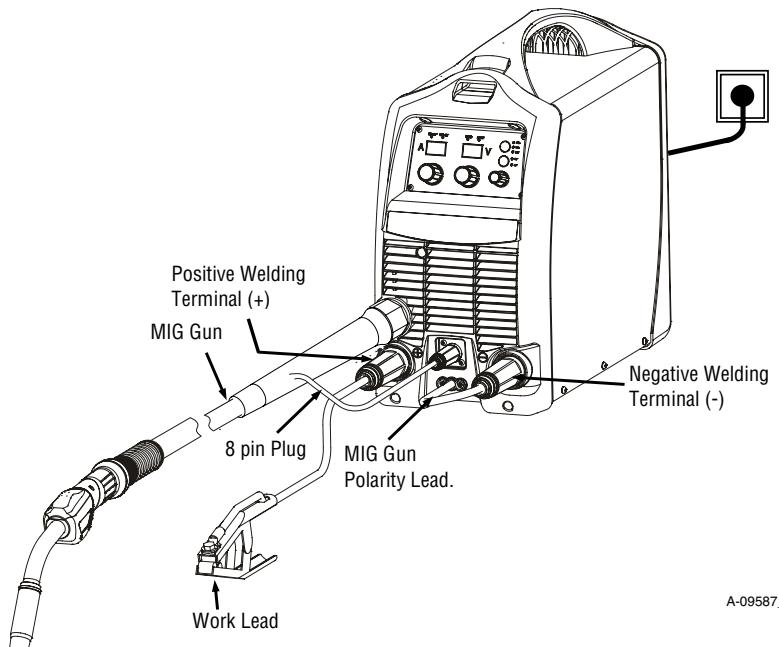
Setup for MIG Welding with Gasless MIG Wire
